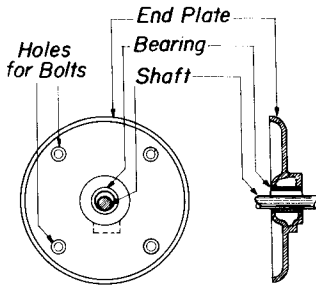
If the shaft can be moved vertically, it indicates a worn bearing or worn rotor shaft.
